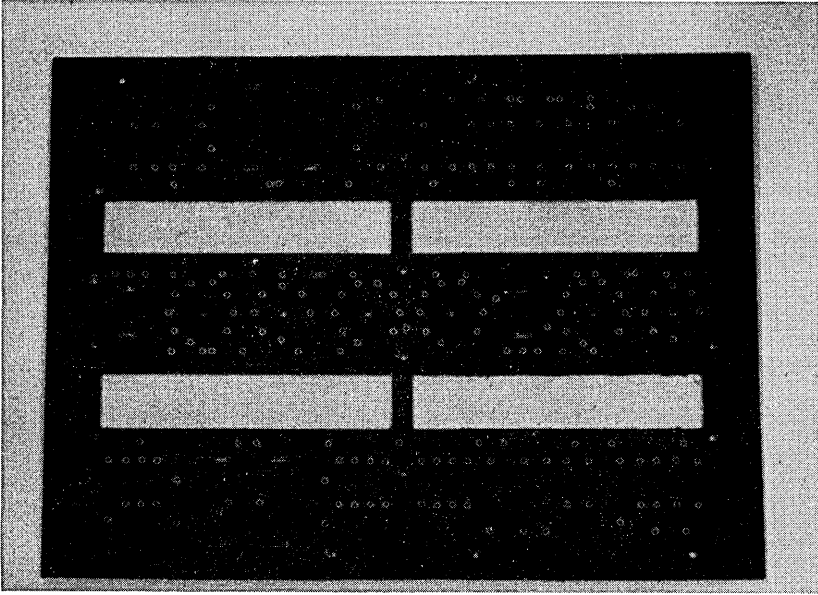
Circuit baseplate with all holes for mounting components punched
